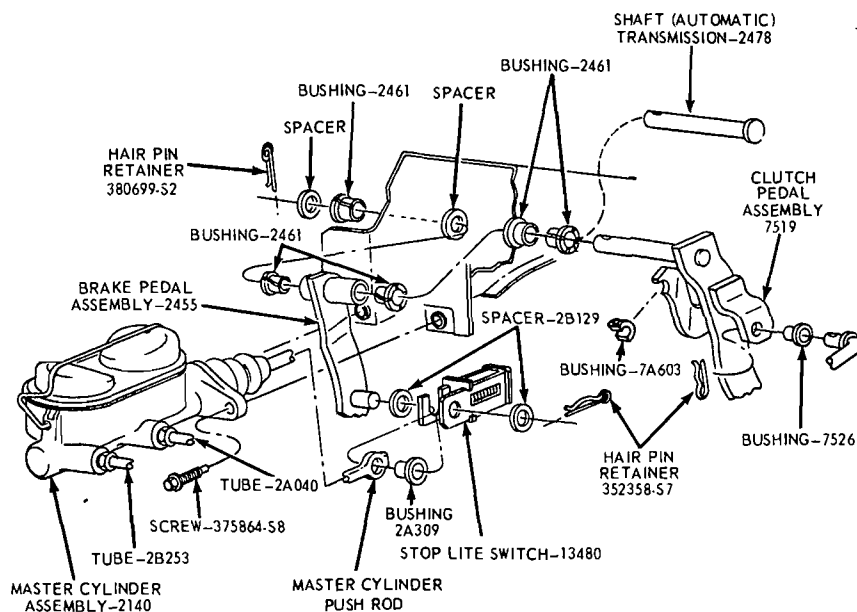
Dual-Brake System Master Cylinder Installation — Mustang and Cougar Without Power Brakes
